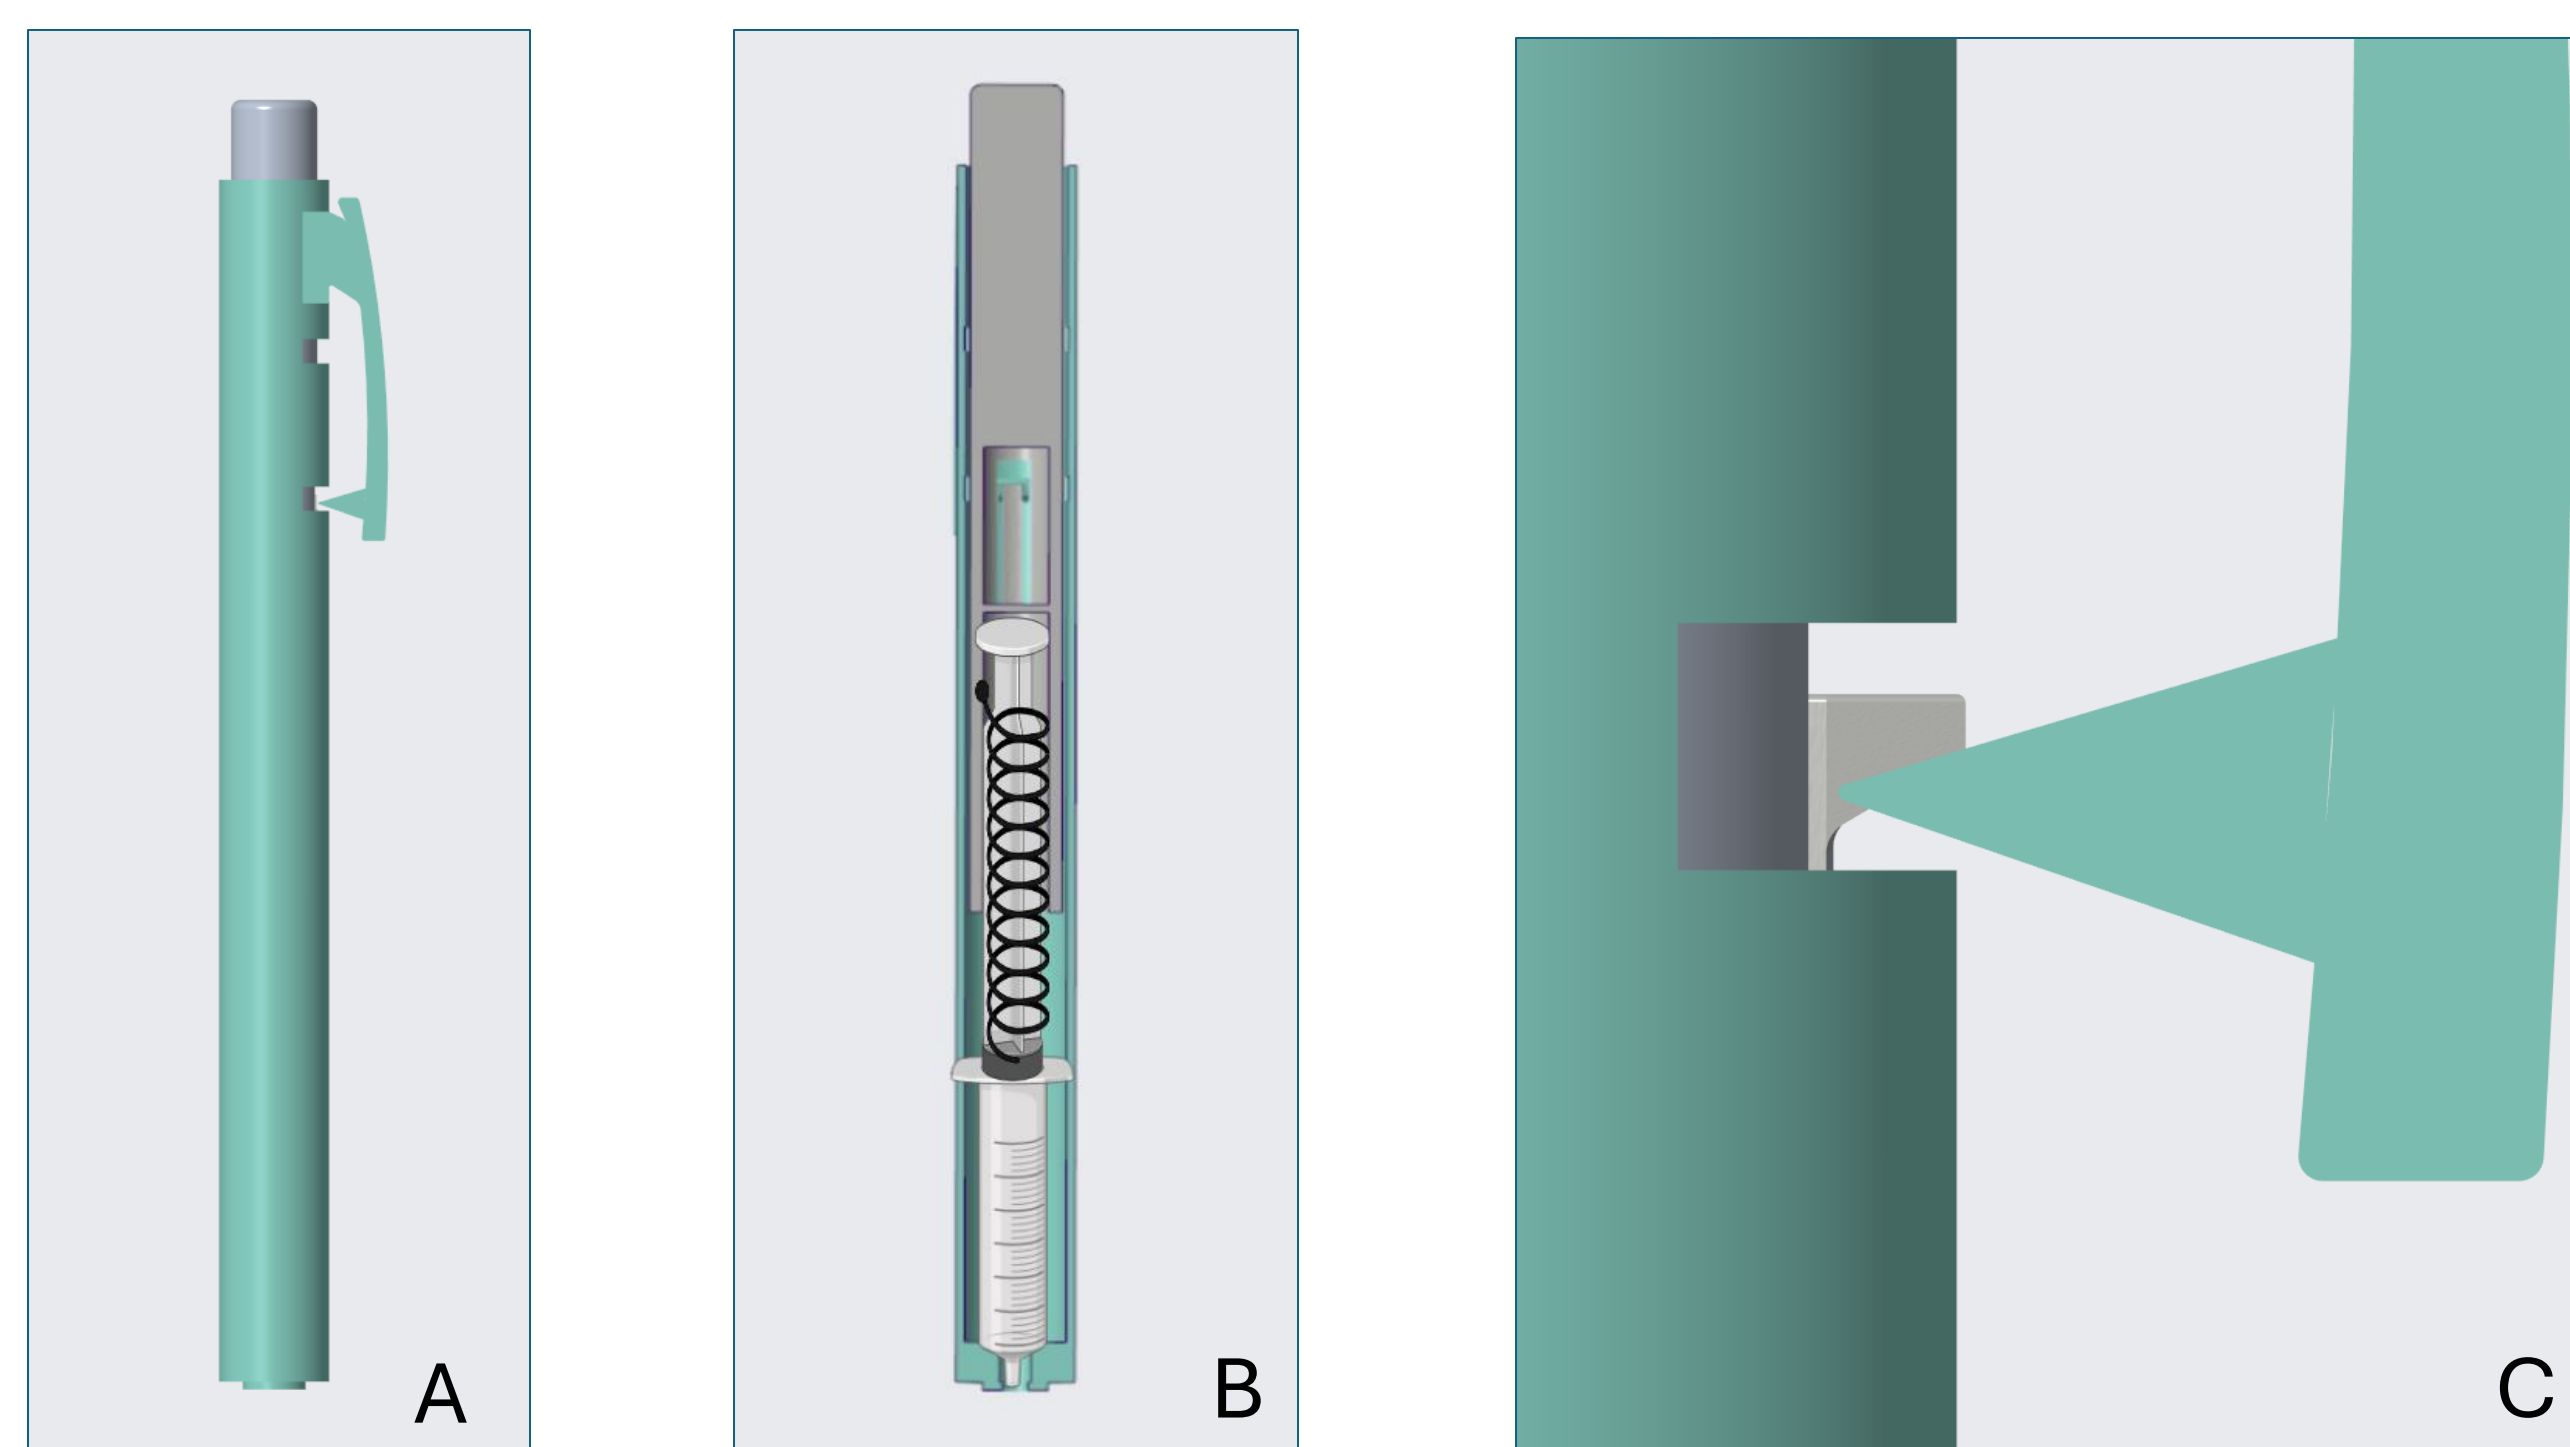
Final prototype of the automated skin punch biopsy tool. (a) Full assembly of the device including the main body and plunger components. (b) Section view of the automated skin punch biopsy tool showing the internal syringe and spring mechanism used to generate suction during sample collection. (c) Close up view of the locking mechanism illustrating how the plunger is secured and released during operation.
